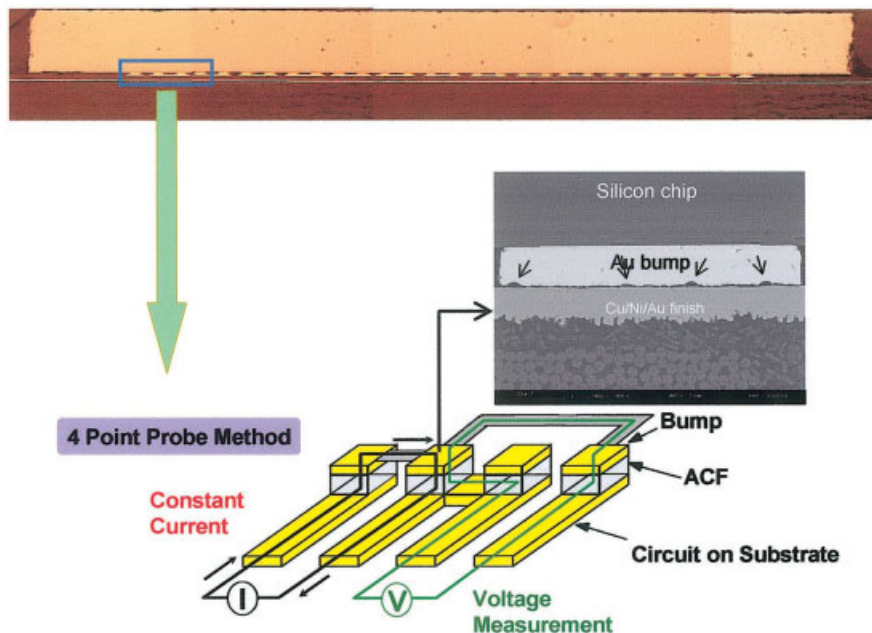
Cross-sectional view of ACF assembly and four-point probing method for contact resistance measurement of single bump.
